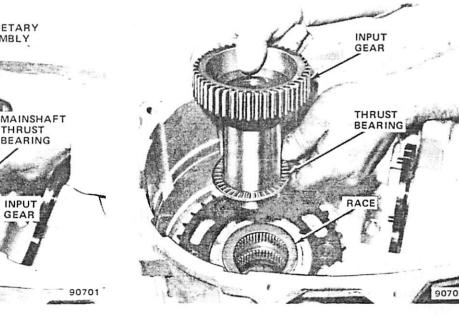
D-62 Input Gear and Thrust Bearing Removal/Installation
